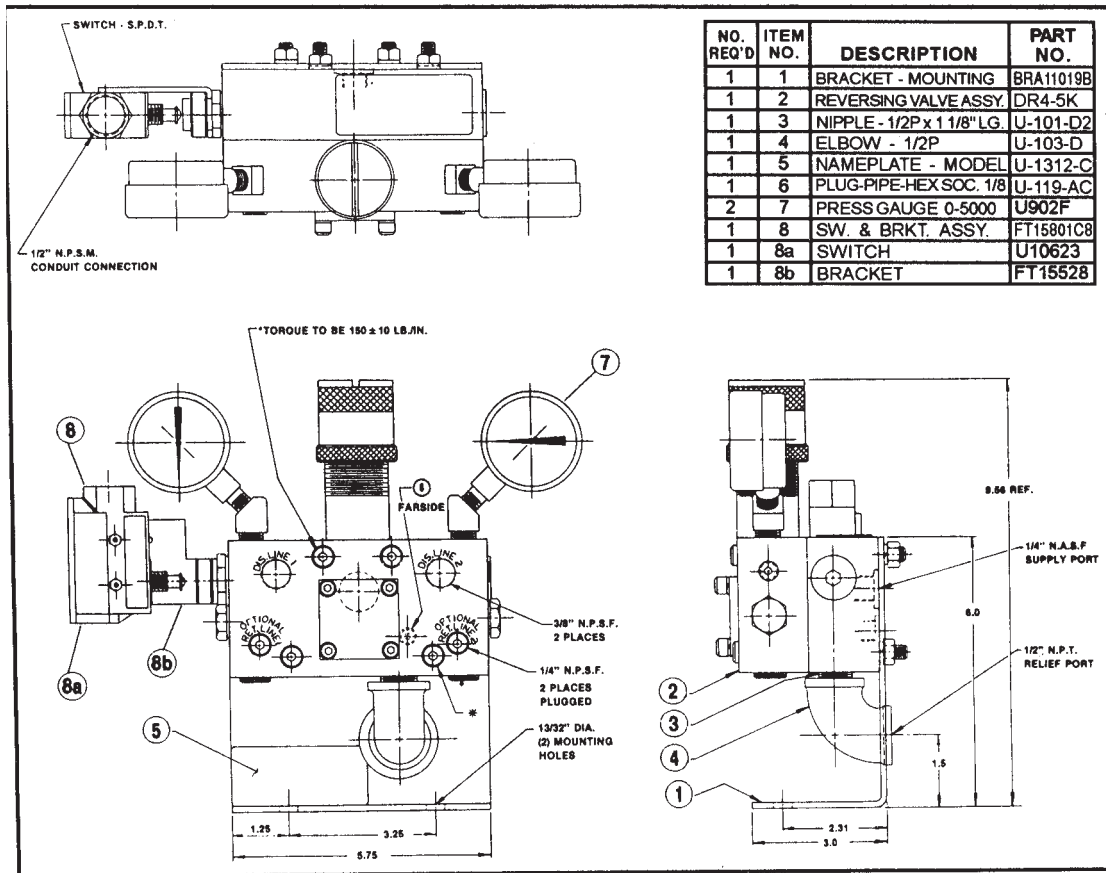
DR4-59 Reversing Valve and Bracket Mounting Assembly for Non-Return Systems
